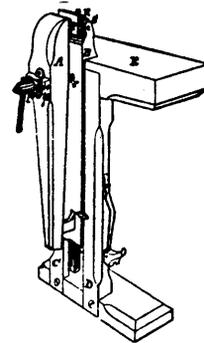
SHOWING CRANK AND LEVER ATTACHMENT.
